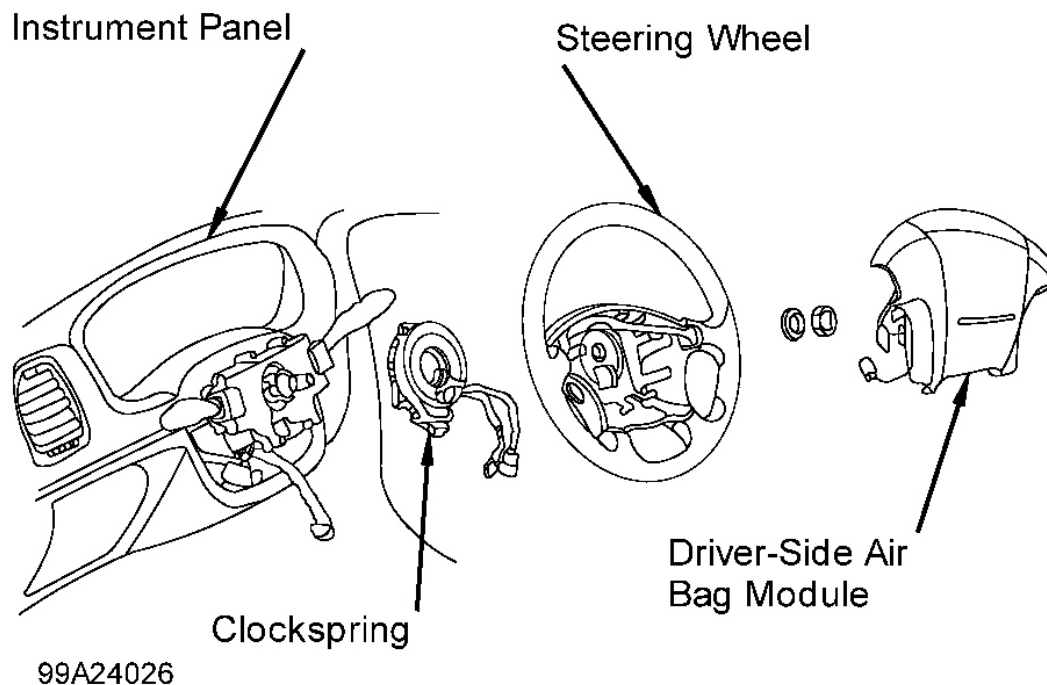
Identifying Clockspring & Driver-side Air Bag Module
